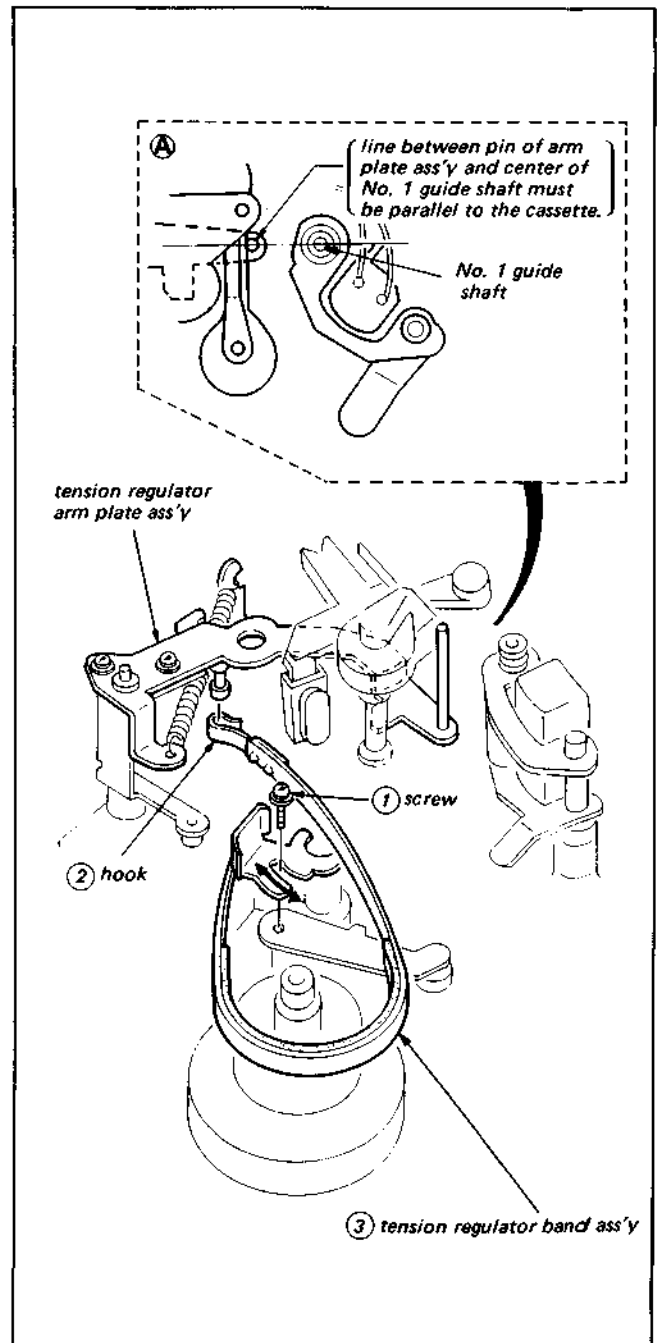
Replacement and adjustment of the tension regulator band assembly
